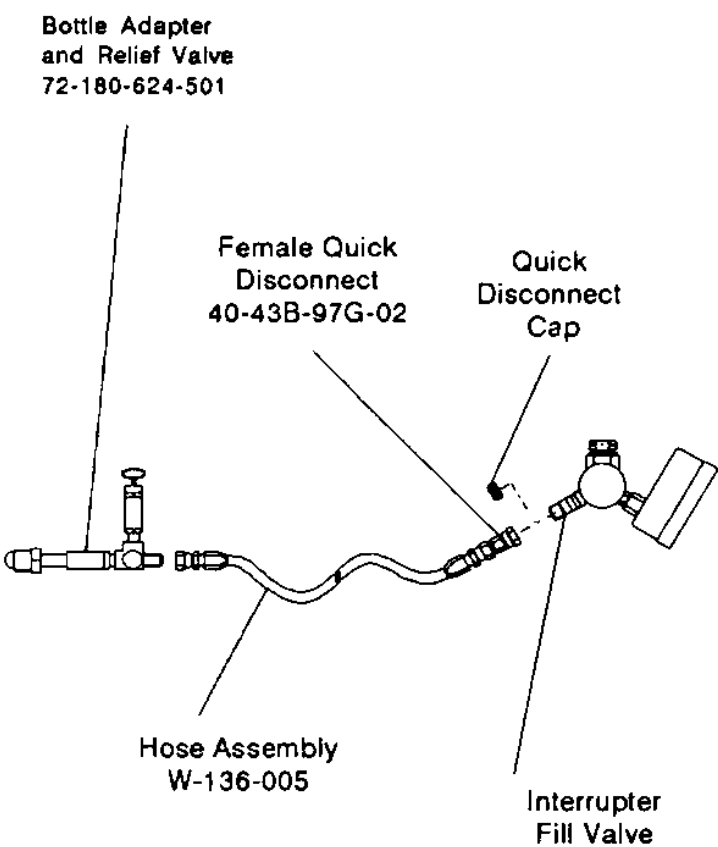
SF₆ Fill Kit 72-265-035-406
